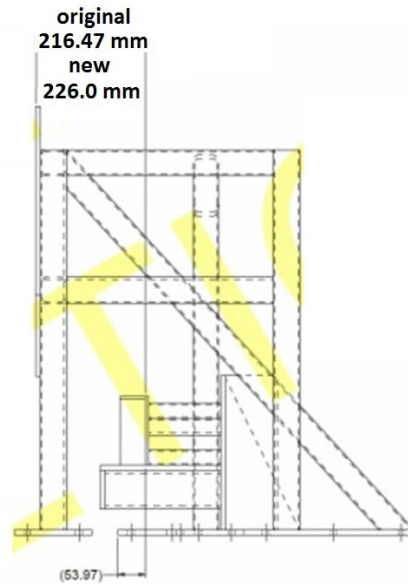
Dimension change on Impactor Frame and Stop Assembly (2921-200)
